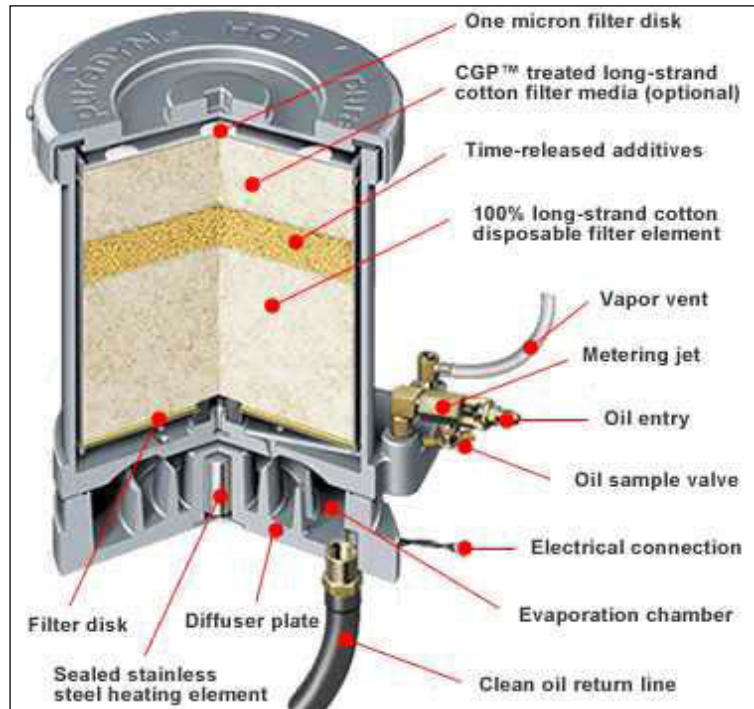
Cutaway drawing of a puraDYN oil-bypass filter.
